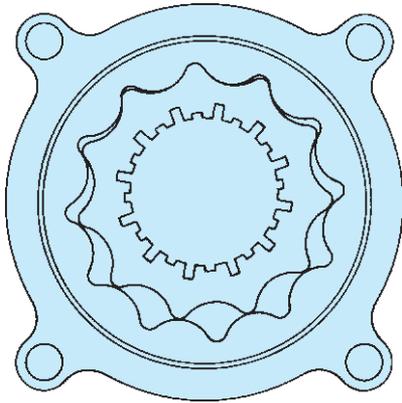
Gerotor-type oil pump driven by the crankshaft.
